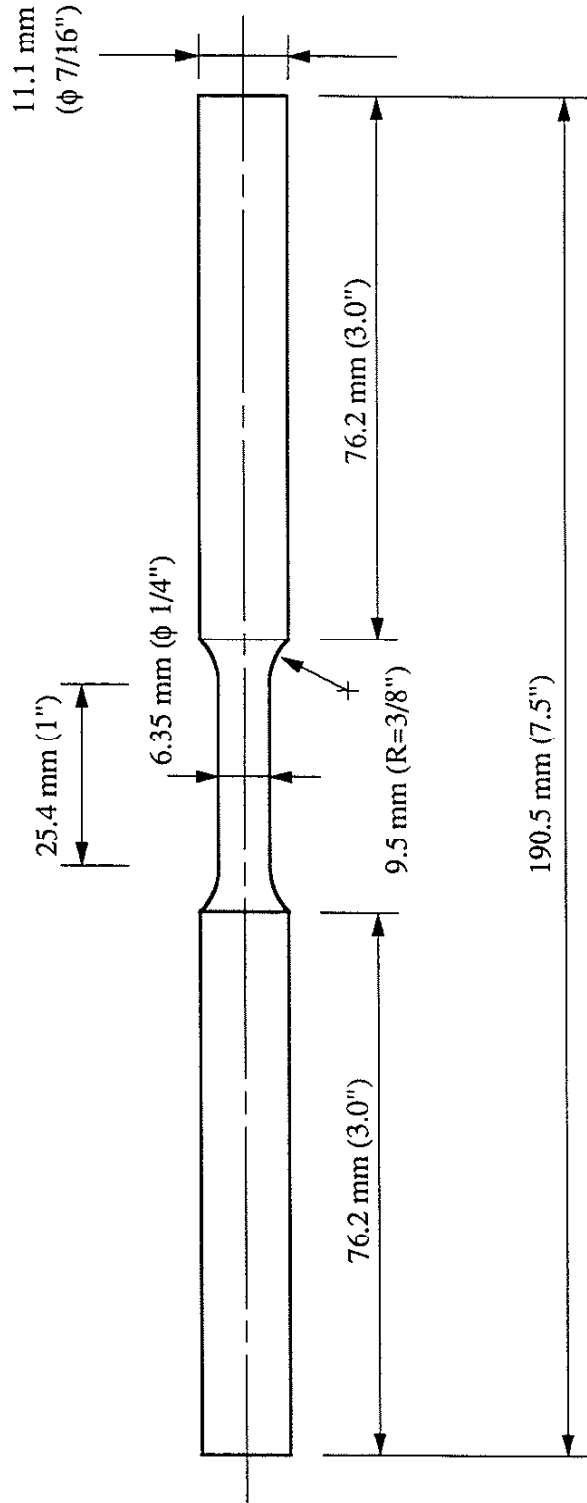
Dimensions of a corrosion-fatigue specimen.
